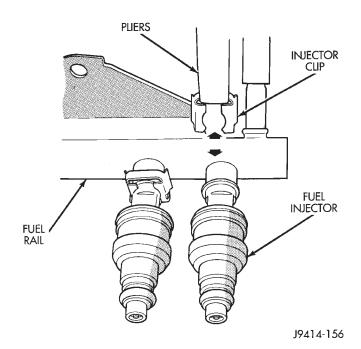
Injector Retaining Clips—Typical Injector FUEL TANK
